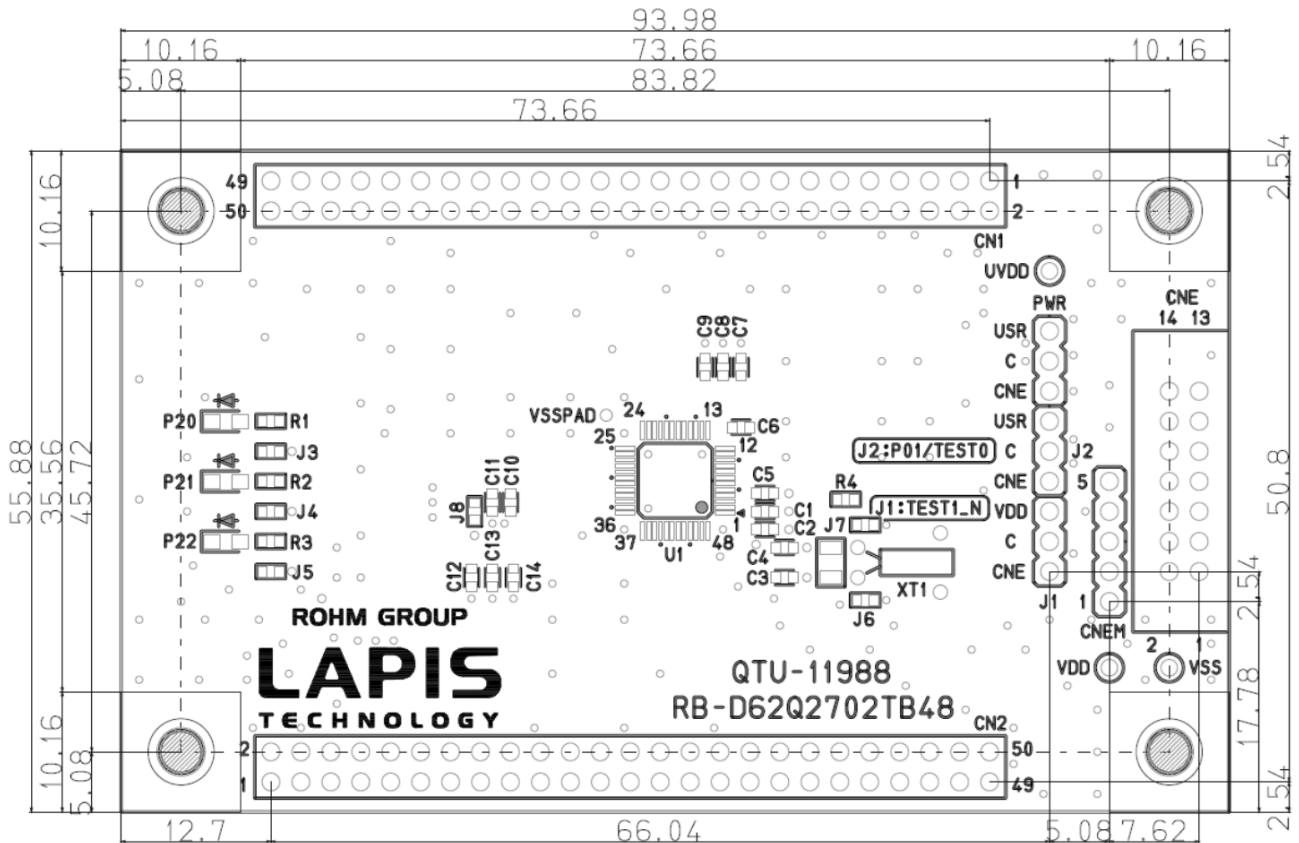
PCB dimensional outline diagram and layout of components (Top view)
